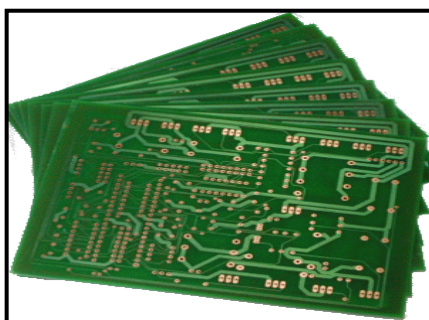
An example of PCB (PCB Fabrication, 2010)
